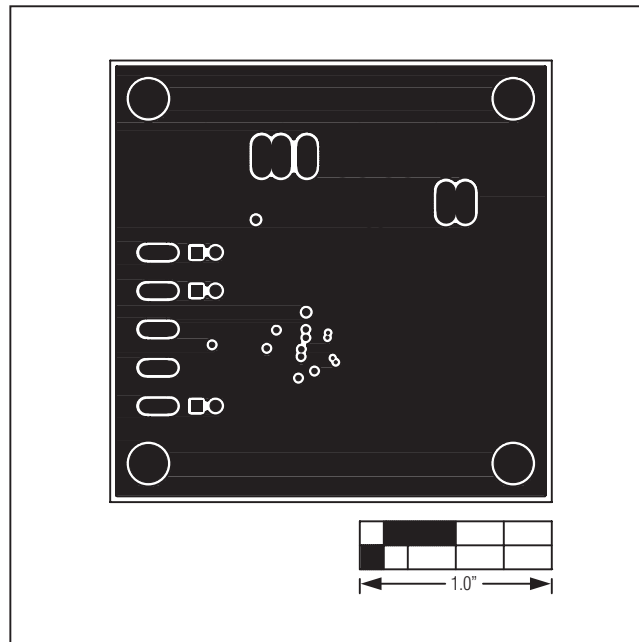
MAX15109 EV Kit PCB Layout—Inner Layer 2
